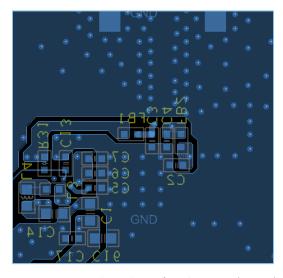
Bottom layer design for 4-layer PCB (QFN56)
